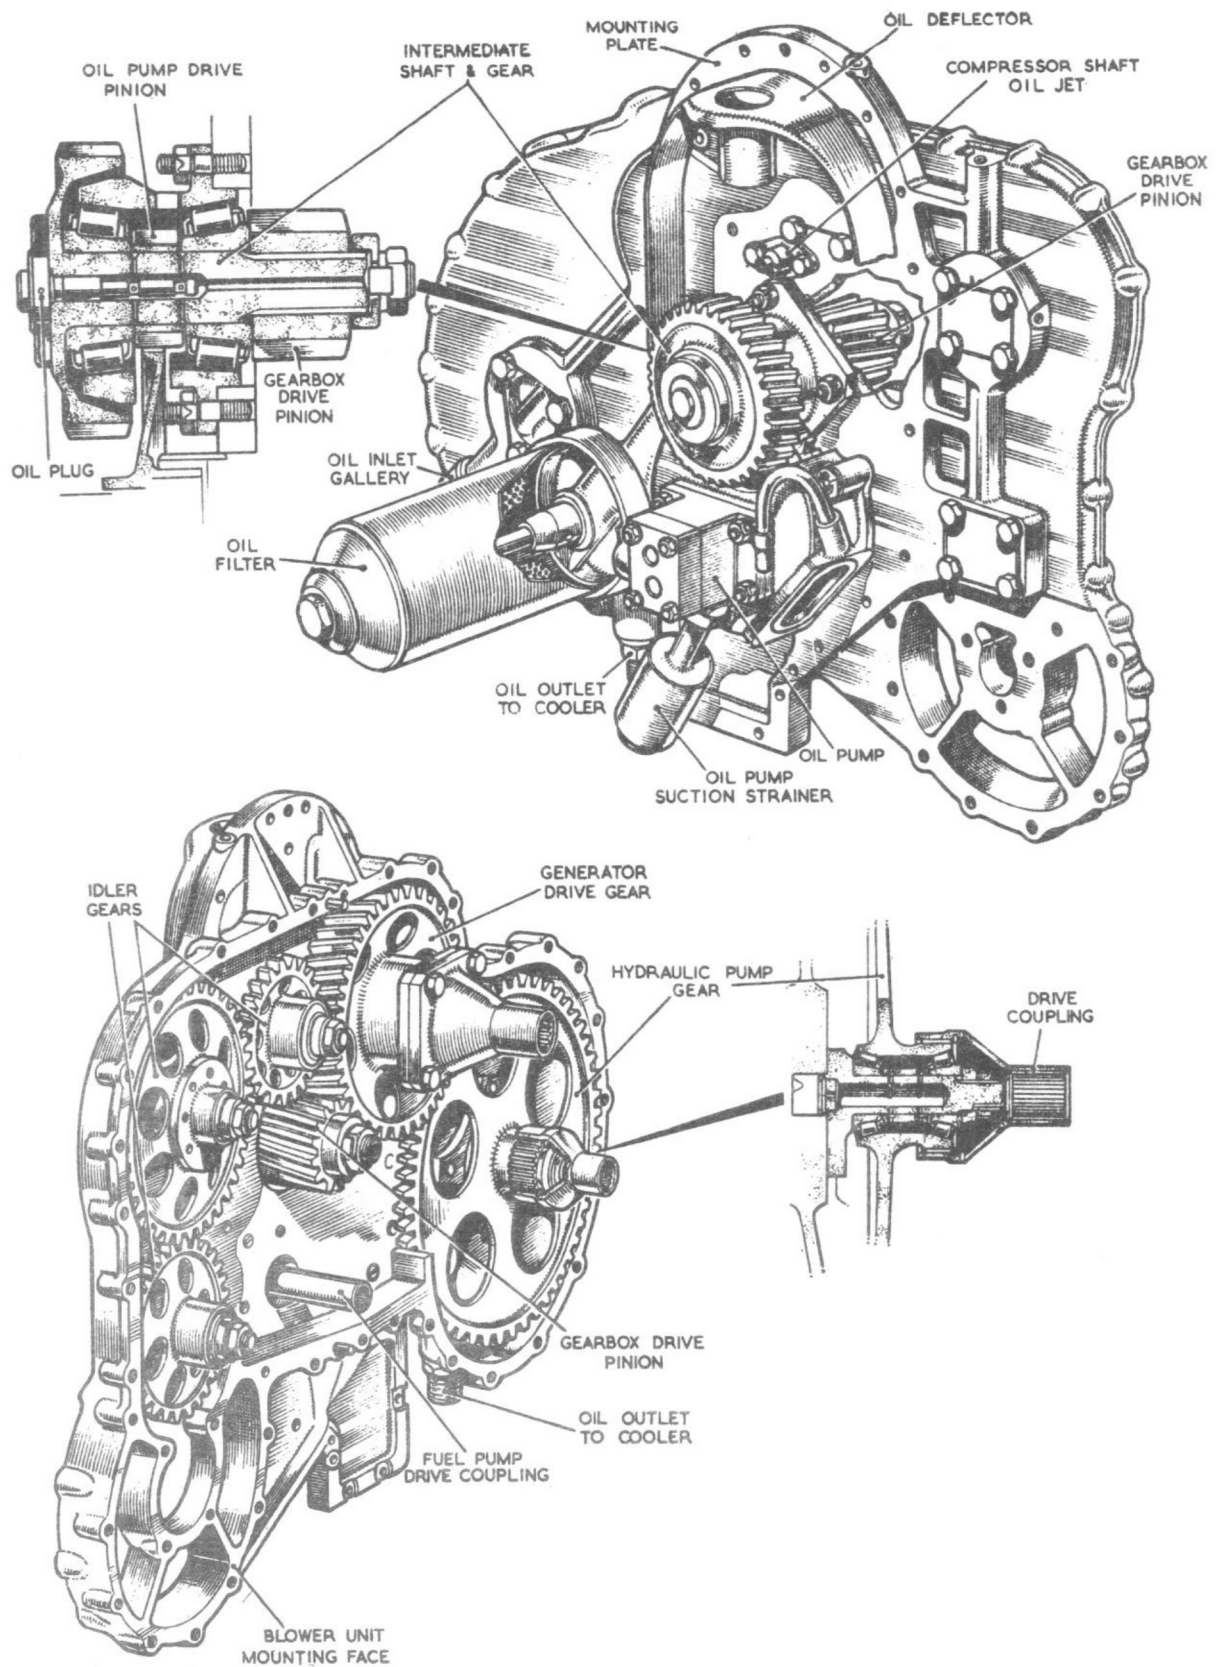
Gearbox and auxiliaries mounting plate assembly
